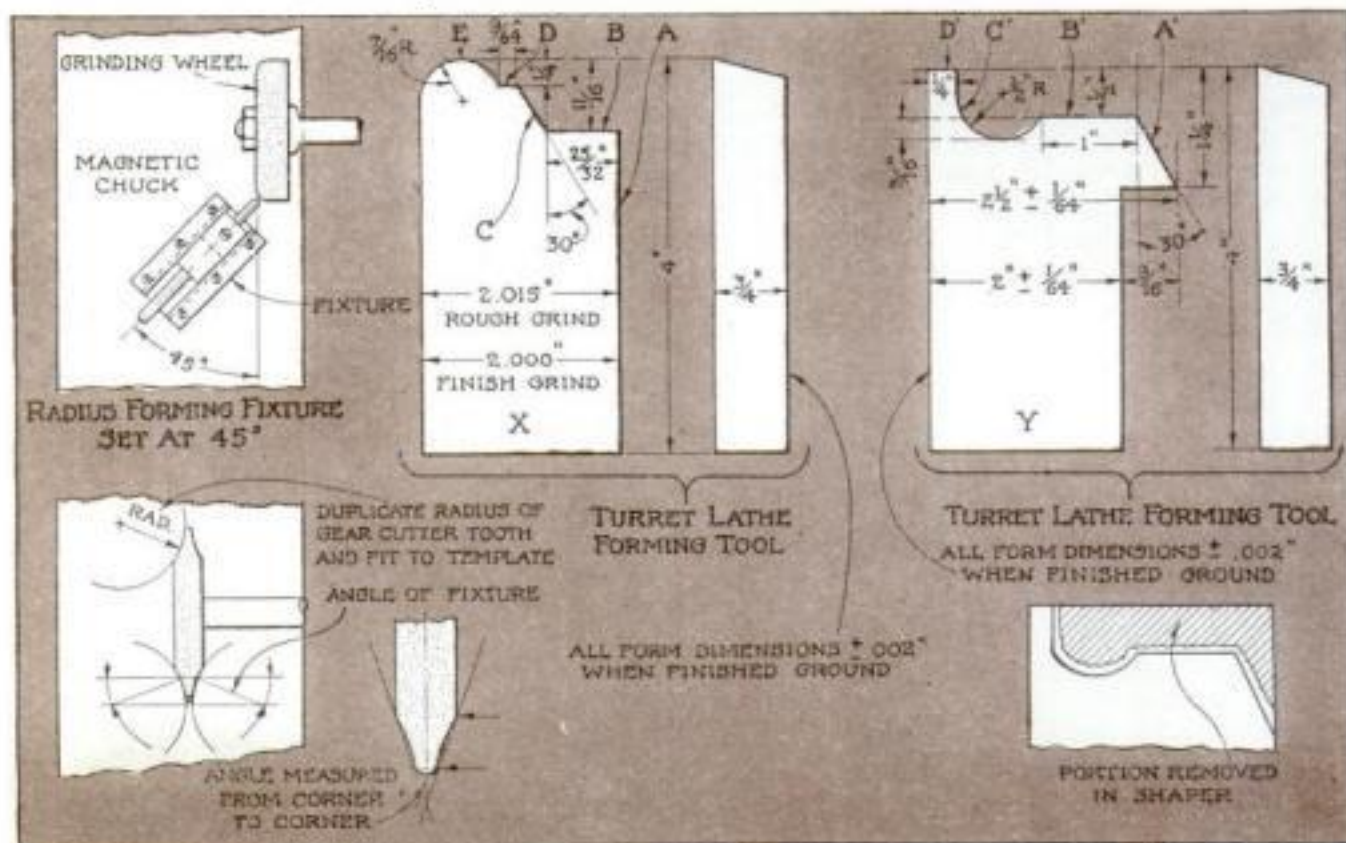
How the radius forming device is used on the magnetic chuck of the surface grinder; a gear form; and two turret lathe forming tools (X and Y) that were ground to shape.
